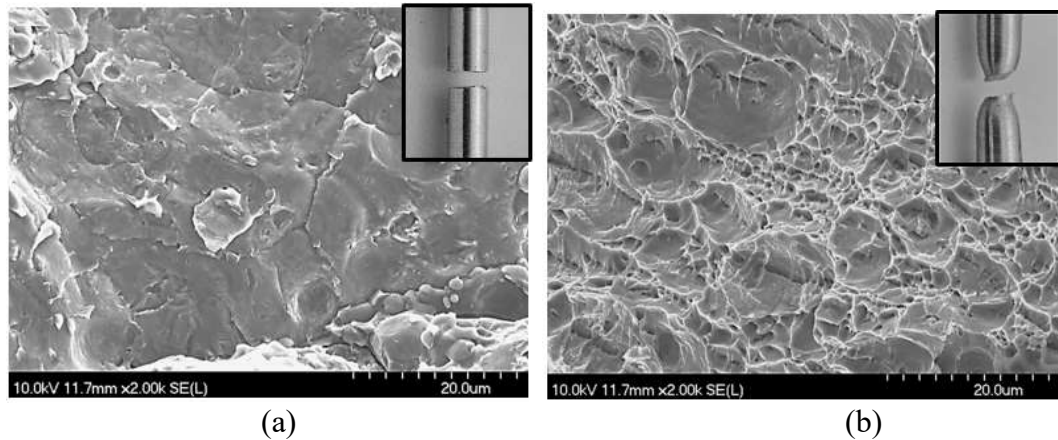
Fracture surfaces observed in (a) SPS processed sample and (b) a SPS+forged sample (forging strain = 0.4). Inserts reveal the macroscopic nature of each fracture.
